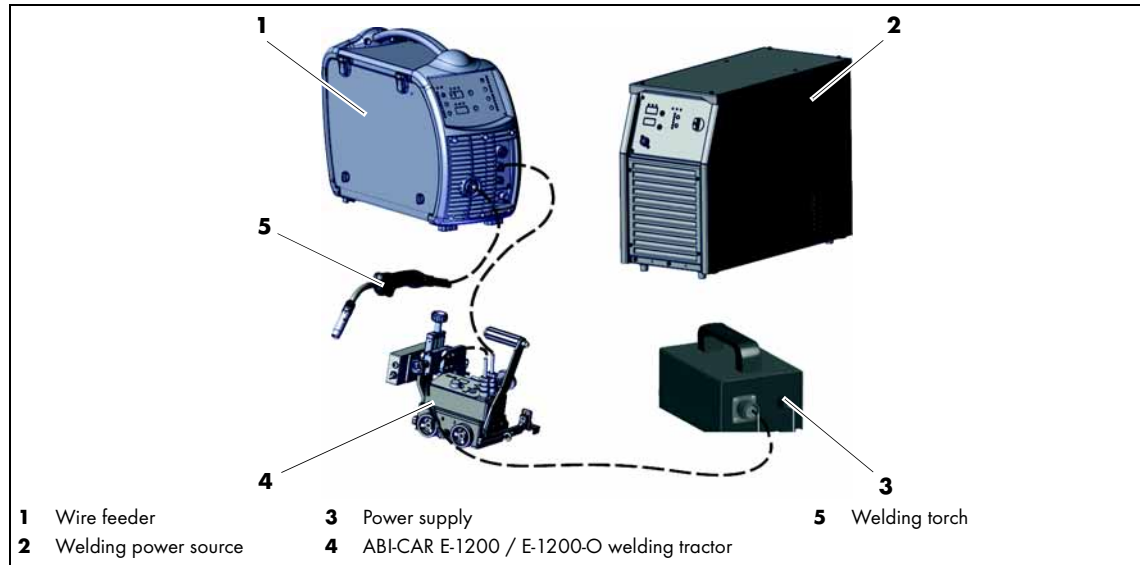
Connection setup (system illustration) for ABI-CAR E-1200
